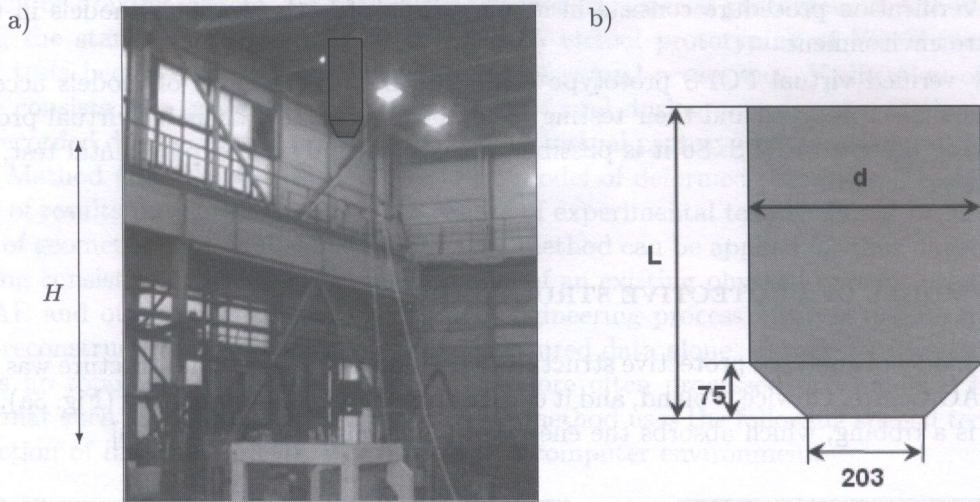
View of test stand (a) and dimensions of test-piece (b)
